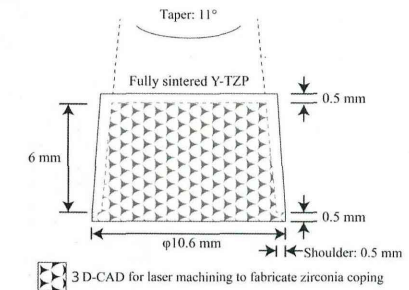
Dimensions of the fully sintered Y-TZP specimen simulating a lower first molar, and 3D-CAD for laser machining to fabricate zirconia coping.
